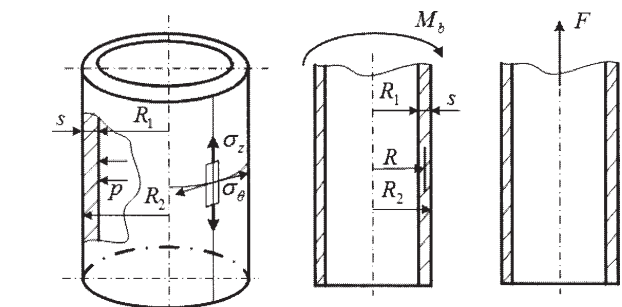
Cylindrical shell ($R_2 / R_1 \leq 1.2$), under internal pressure p (a) or bending moment M_b (b) or axial force F (c)
